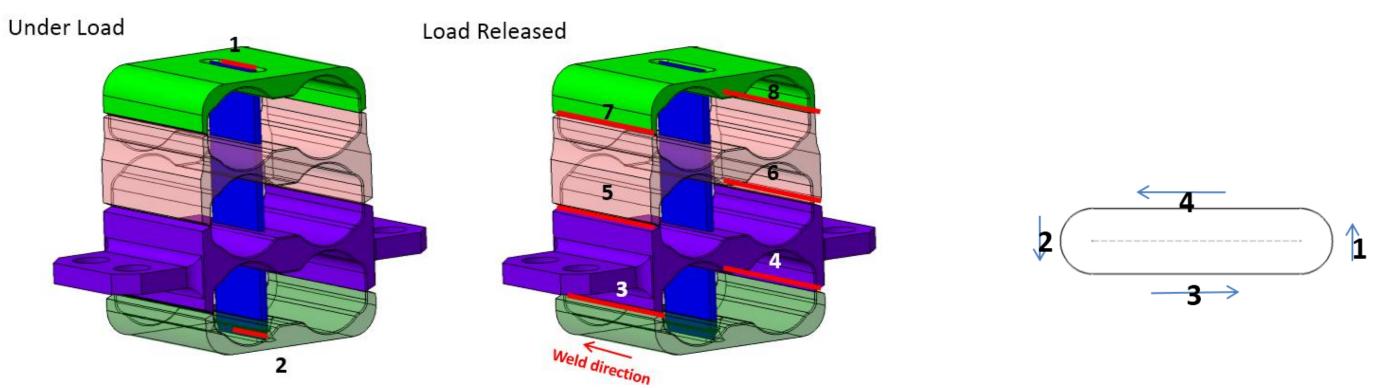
Weld sequence of ELM\_07 and comb weld sequence
